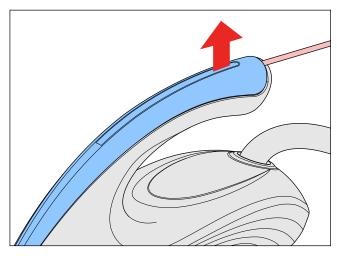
Using "-" screw driver to lift up the Inlay and release the catch at the end of the handle.
